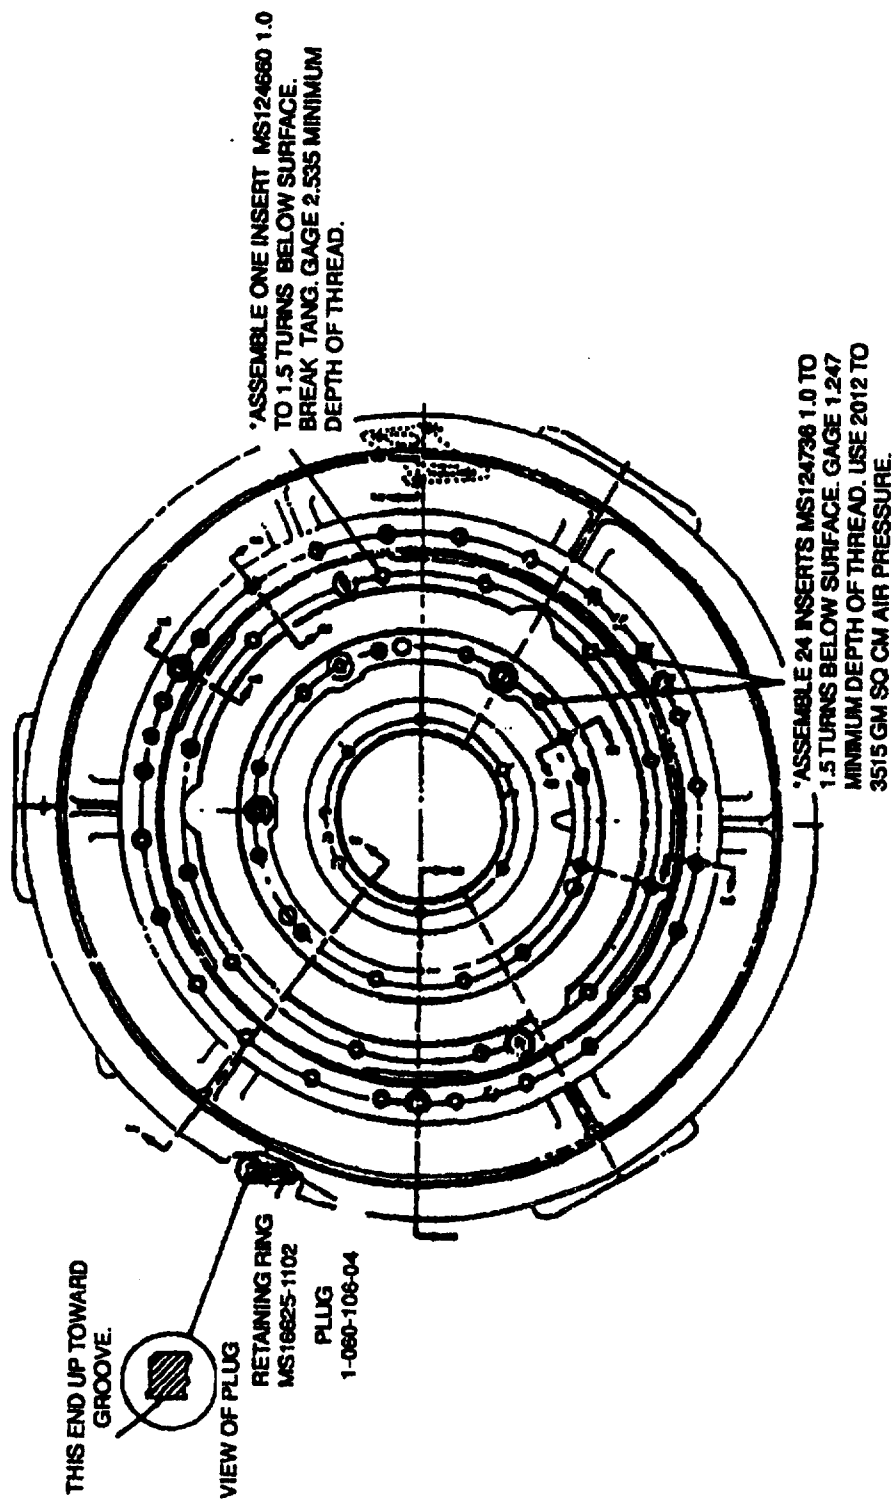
Repair of Inlet Housing (English) (Sheet 3 of 4).
